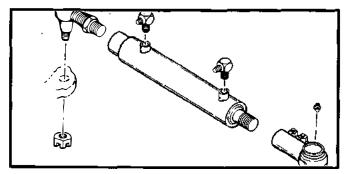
Steering Ball Joints and Spindle Bearing lube points are accessed from under the front of the sweeper. Lube points are located on top corner of frame and top of front fork.
